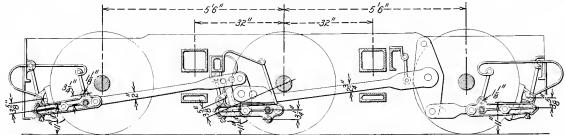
Arrangement of Brake Rigging on Six-Wheel Truck with Waycott Special Brake Beams.
